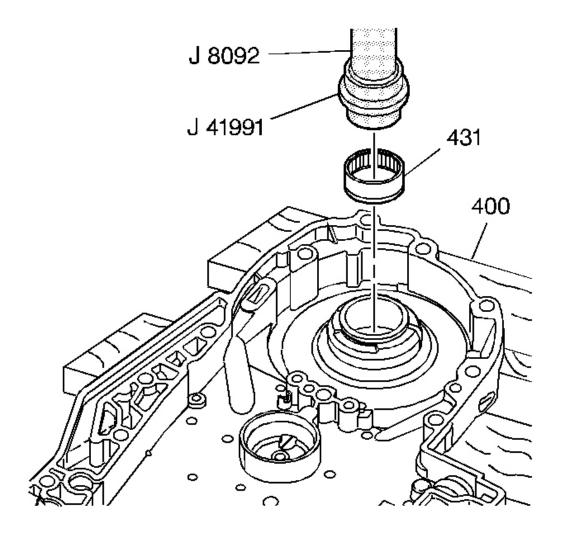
Pressing Drive Shaft Bearing In With J 8092 & J 41991 Courtesy of GENERAL MOTORS CORP.
